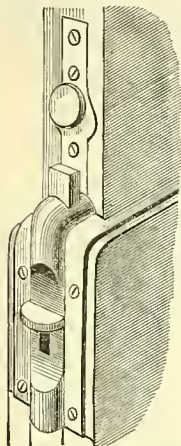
HEAD-BOARD BOLT. Outside View.
